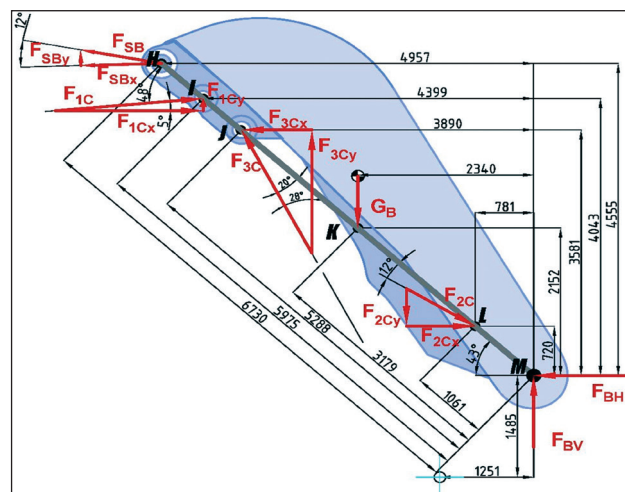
Boom – part of the arm of the hydraulic excavator Liebherr R9350 with load displacement and dimensions which is connected to the base of excavator
